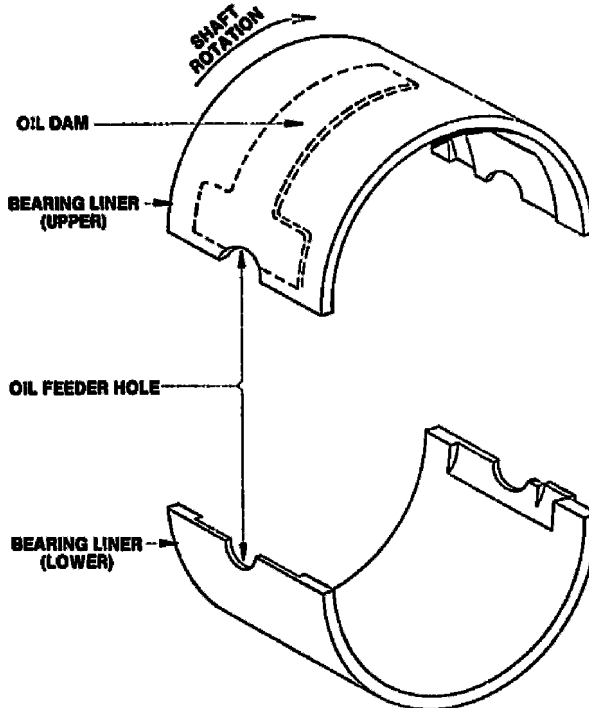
Pressure dam bearing. (Dresser-Rand Company, Olean, N.Y.)
